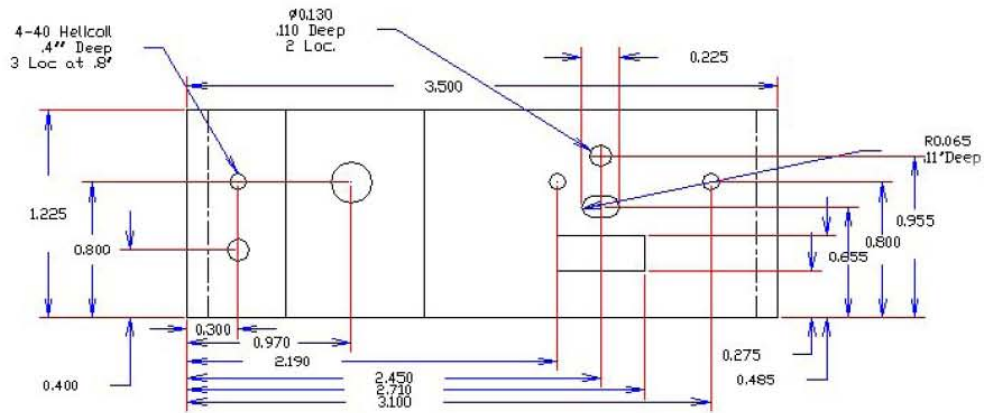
USB2000 Outer Dimensions (Inverted Front View)
